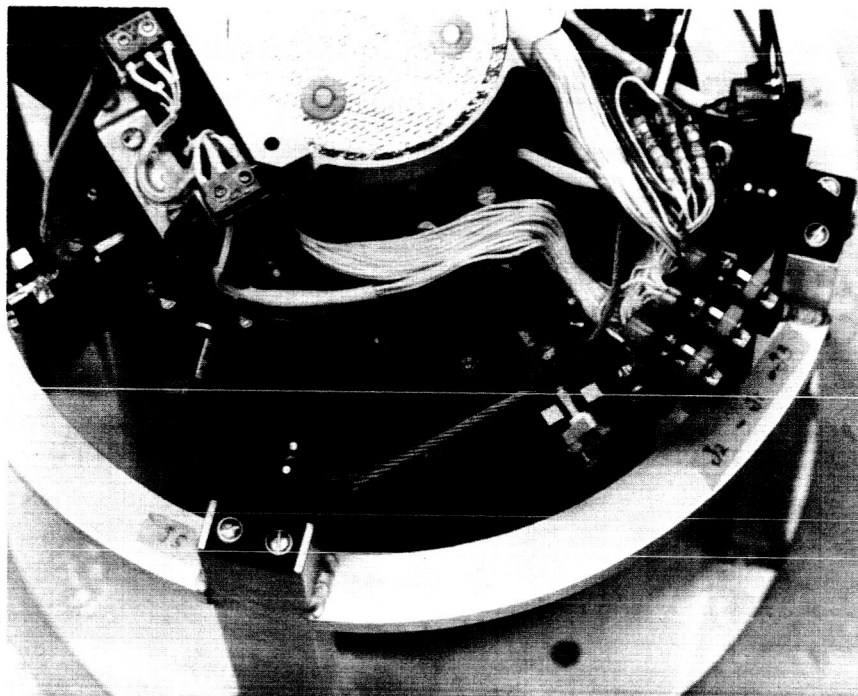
Cable Cutter Performance, Engineering Unit 1
